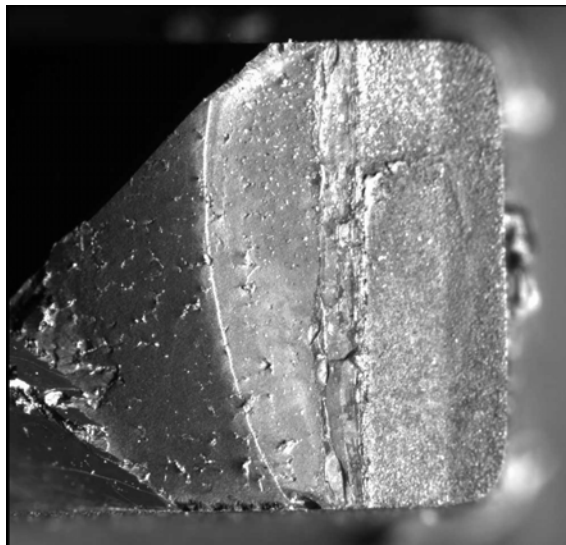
Beachmarks on the fracture surface of a step loaded specimen. S/N:A2LRY-3 1900°F, R = 0.05, 900 Hz.
